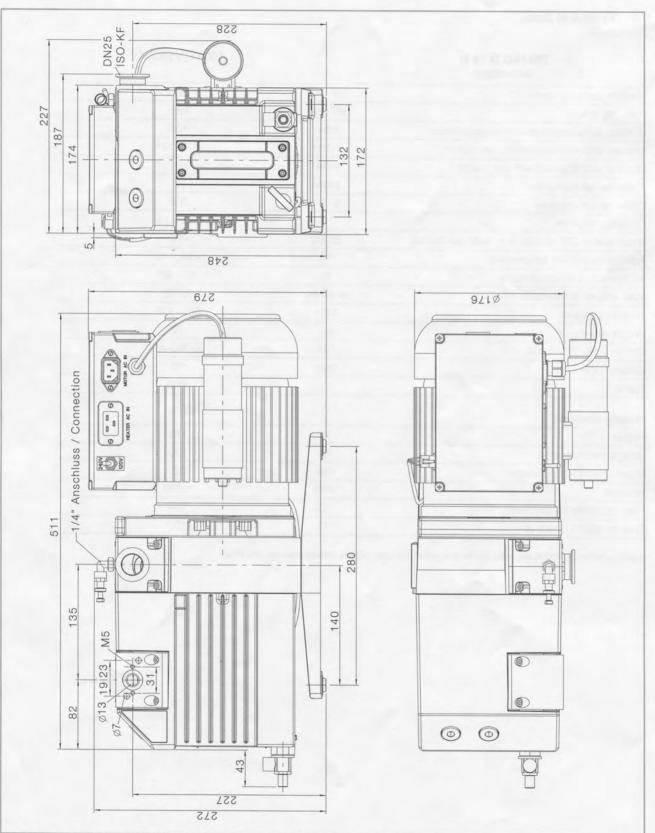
Dimensional drawings for the TRIVAC B pumps (dimensions in mm; 1 inch = 25.4 mm)
